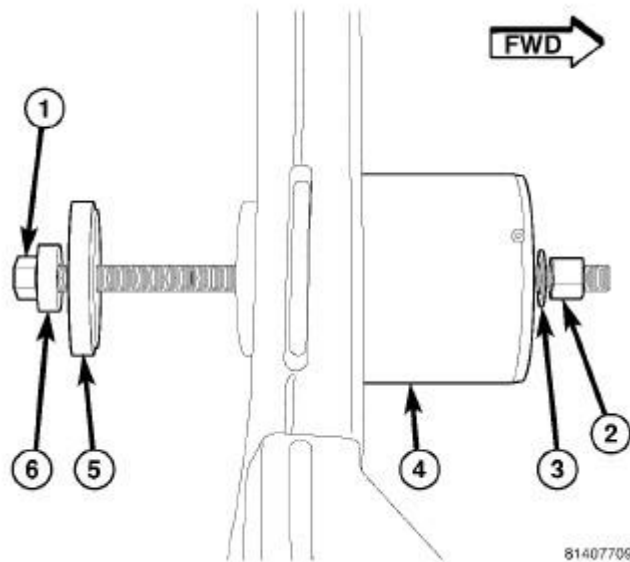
TOOLS ASSEMBLED FOR BUSHING REMOVAL
